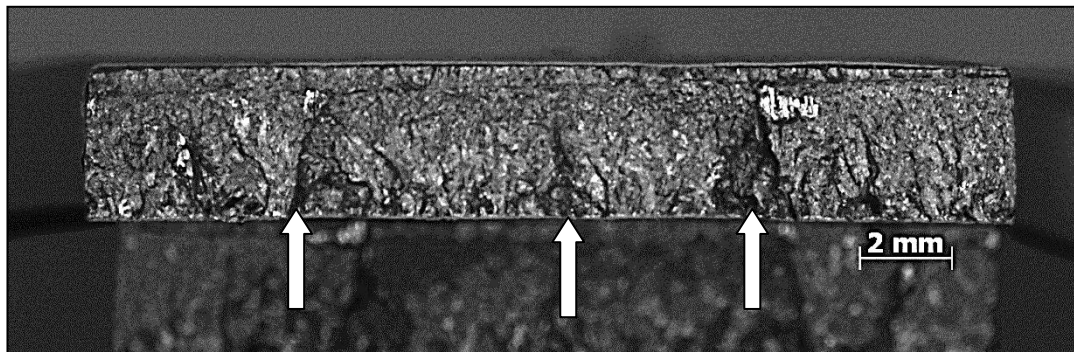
Indication of fatigue failure of laser formed specimen
